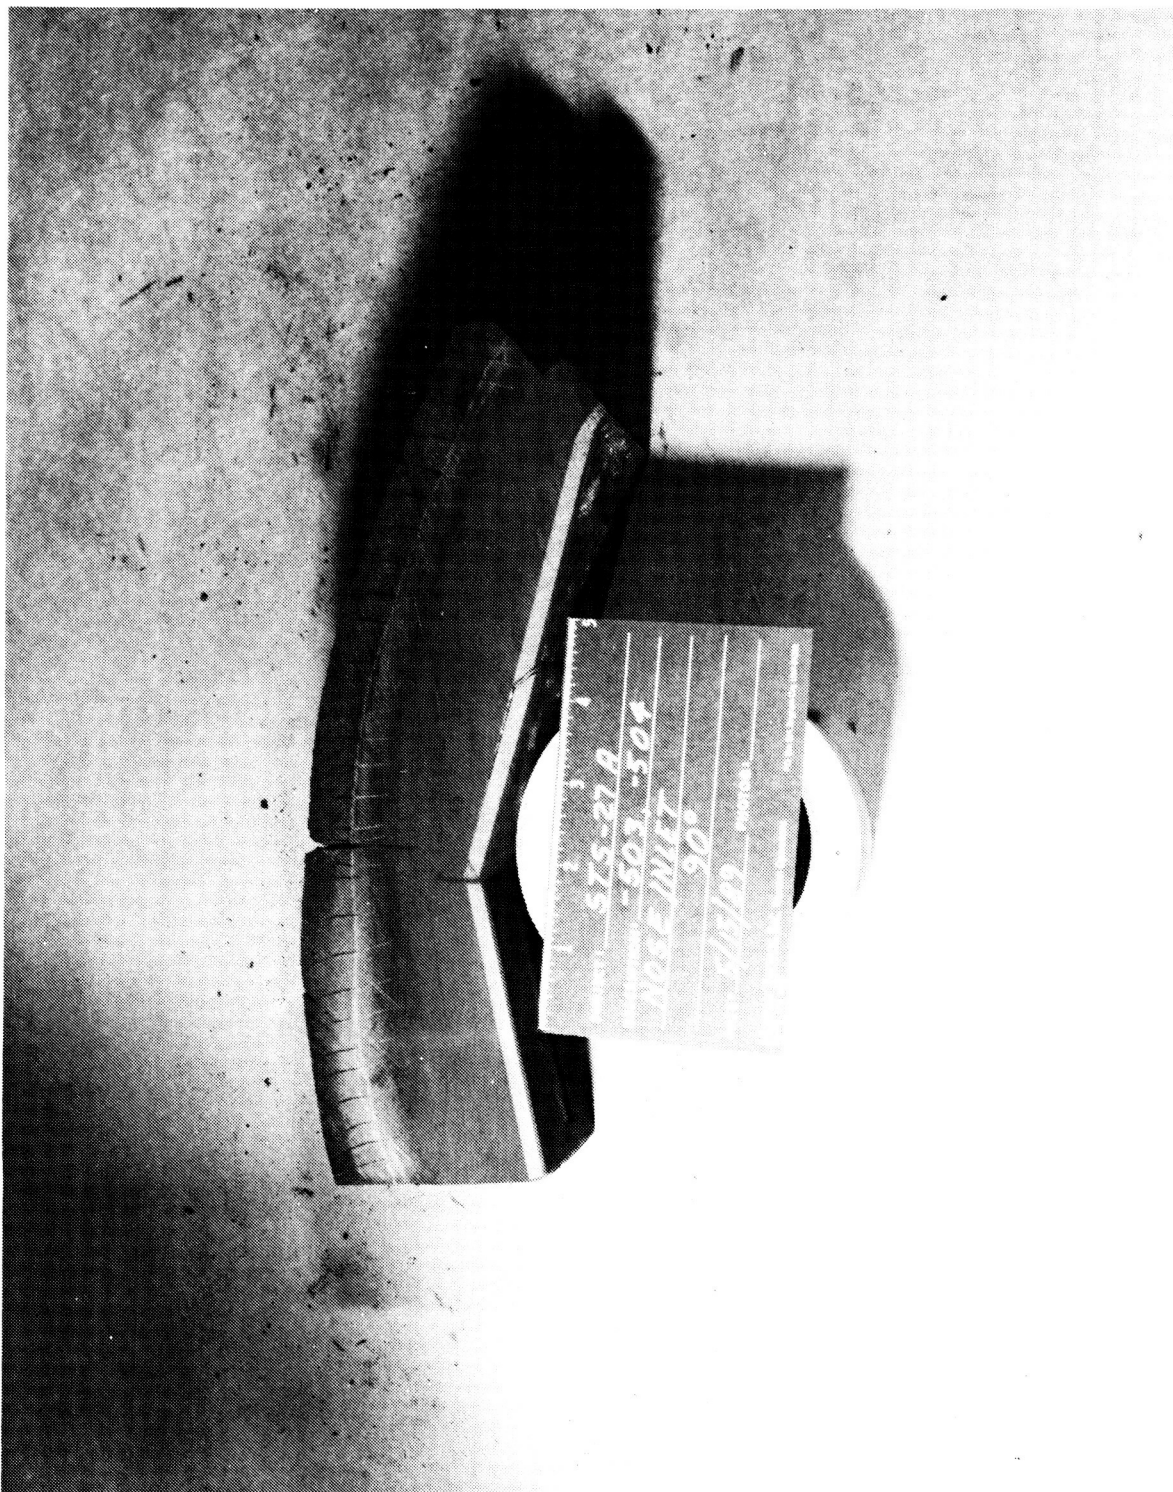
STS-27A -503/-504 Ring Sectioned View (90 degrees)
